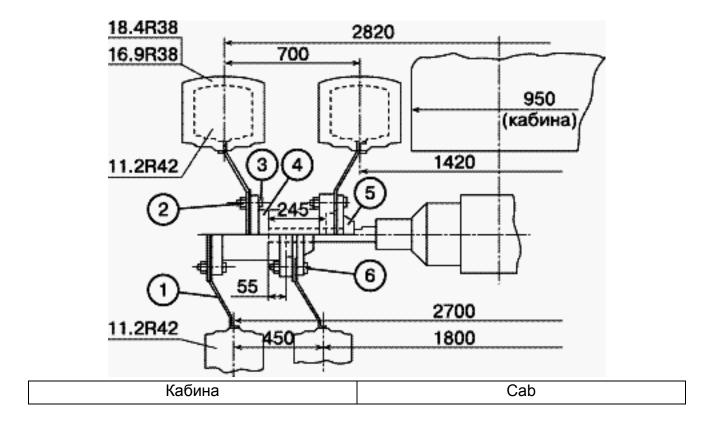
Installation scheme of doubled rear wheels with spacer for rows of 450 mm or 700 mm:
